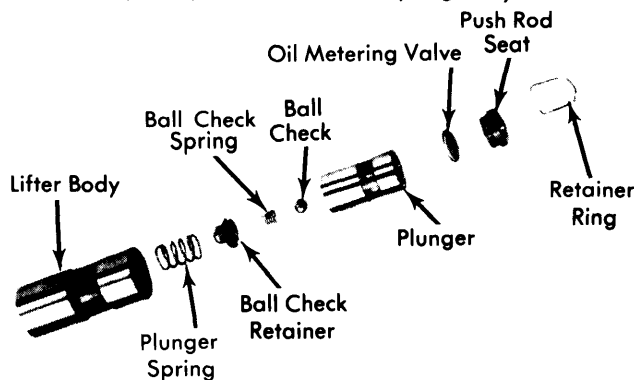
Exploded View of Hydraulic Valve Lifter Assembly
